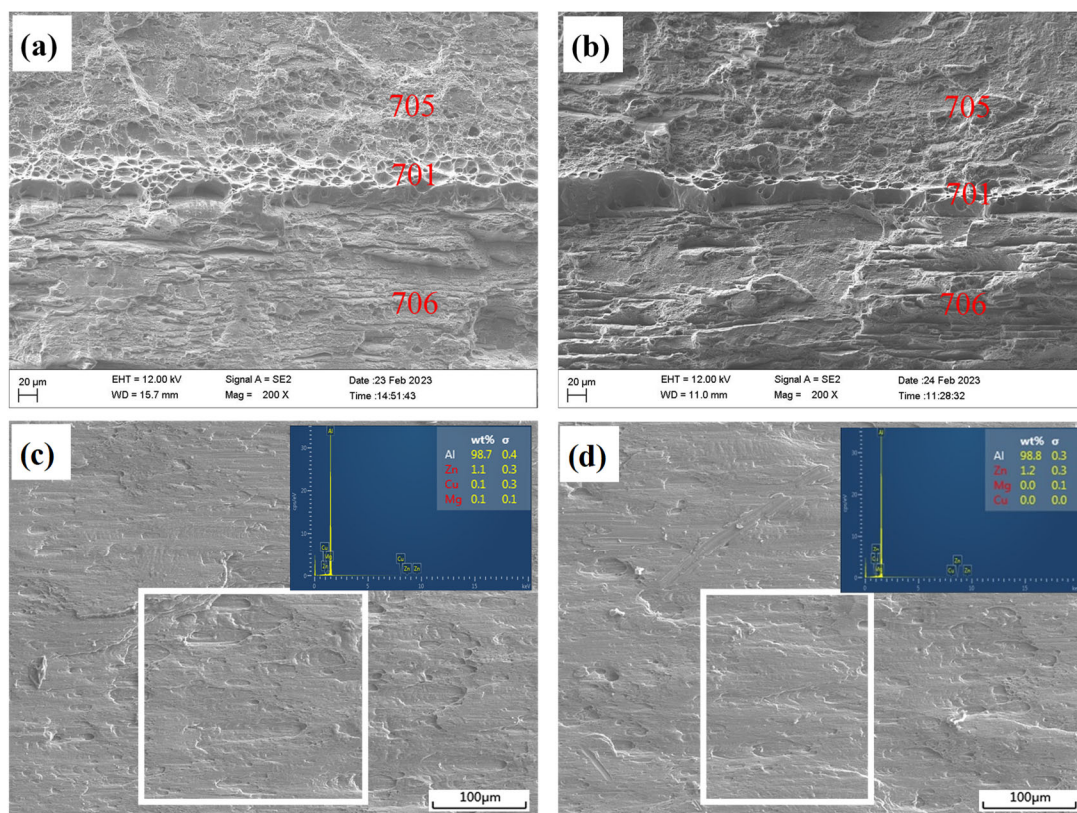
Fracture morphology and selected EDS results of aluminum alloy laminated composite plates: (a) tensile fracture of five-layer composite plate; (b) fracture of seven-layer composite plate; (c) tensile–shear fracture of five-layer composite plate and EDS result of selected area; (d) tensile–shear fracture of seven-layer composite plate and EDS result of selected area.
